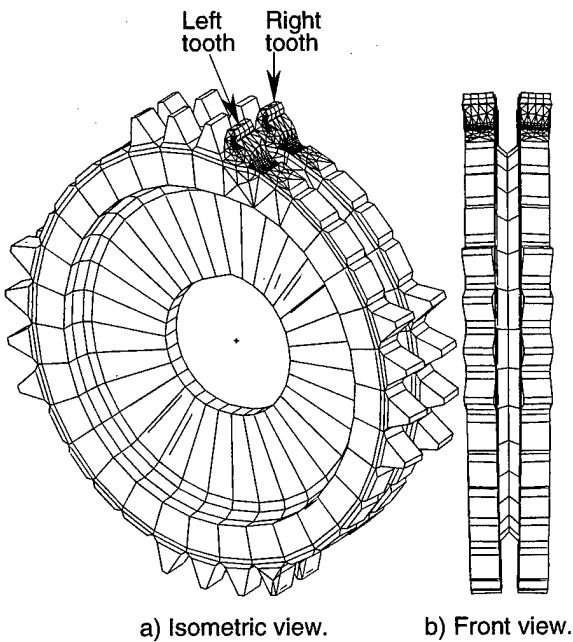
Boundary element model deflections of an uncracked split-tooth bending fatigue test gear.
